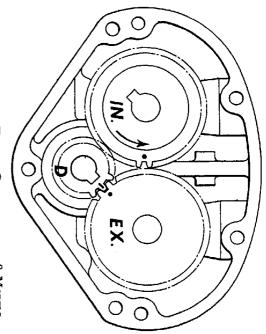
Setting Timing Gears on 1945-48 Models.
